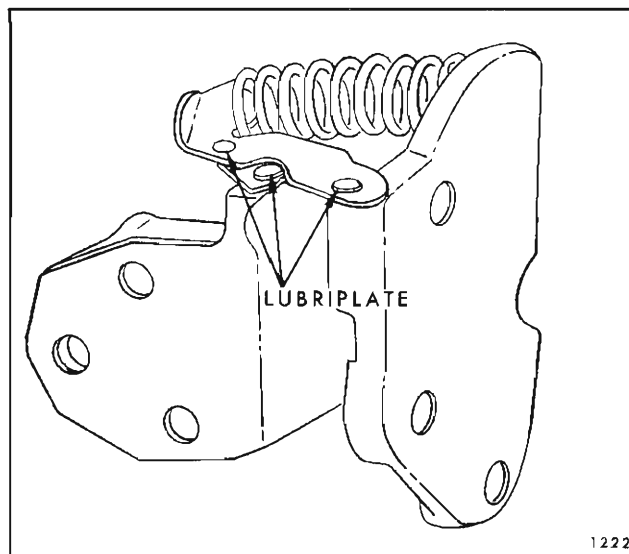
B1—Front Door Hinge Hold Open: Lubrication of Rear Door Hinge Hold Open Typical
